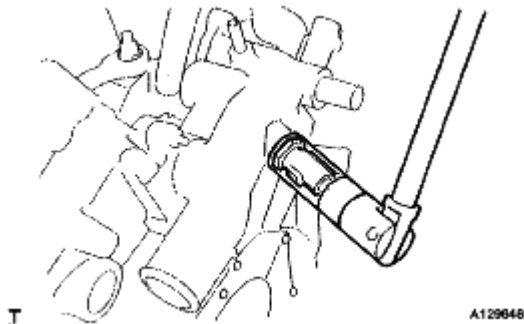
Removing/Installing Engine Coolant Temperature Sensor
